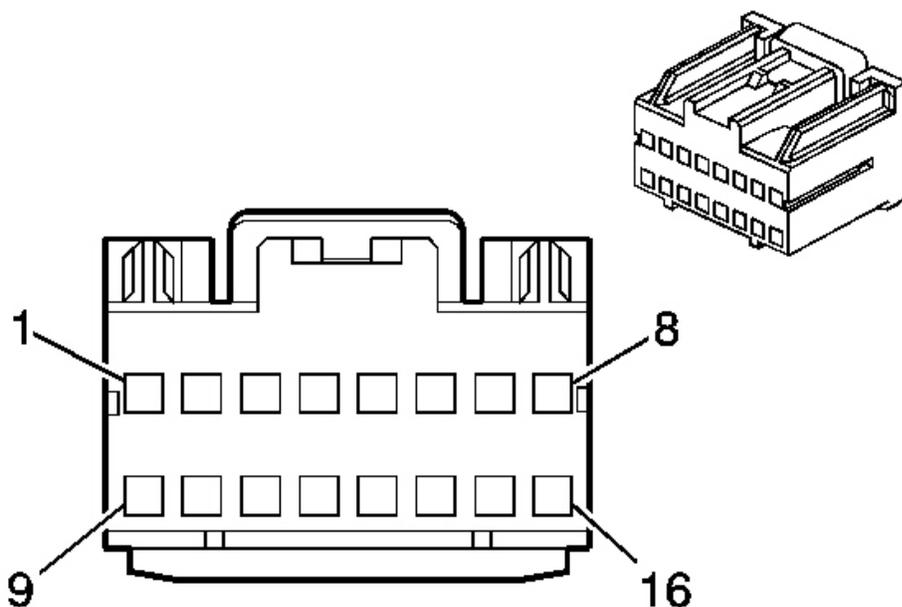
Identifying Driver Door Switches (Without AXC Or AXE)
